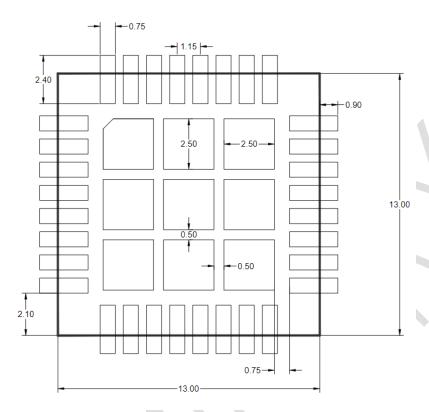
RECOMMENDED PCB FOOTPRINT.
